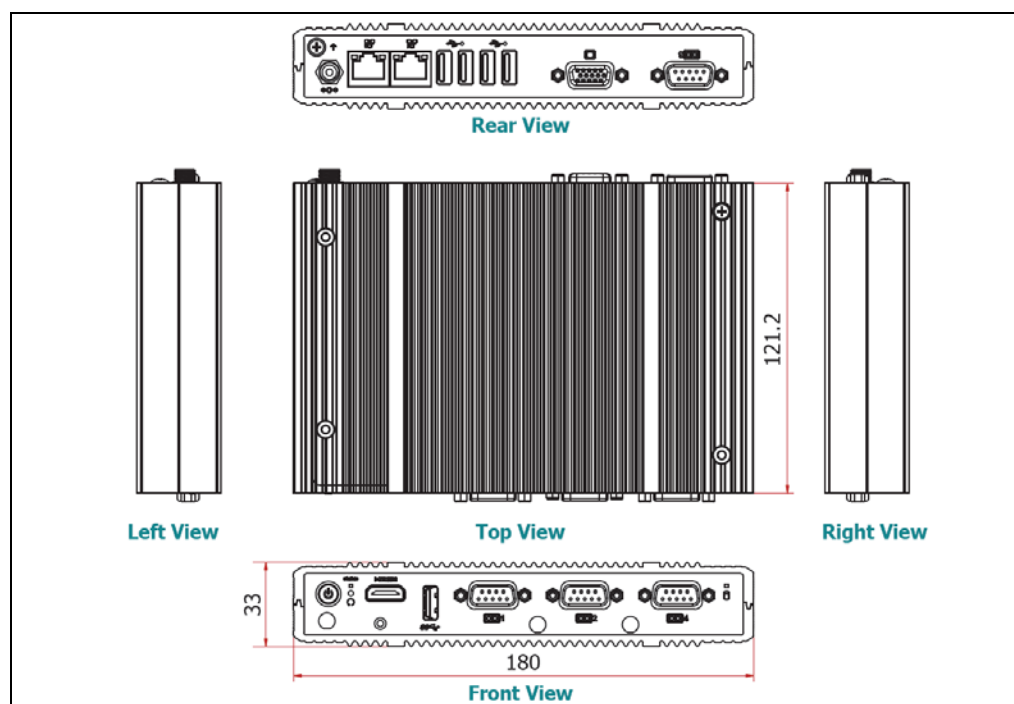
Dimensional drawing for the Traffic Controller FPS
